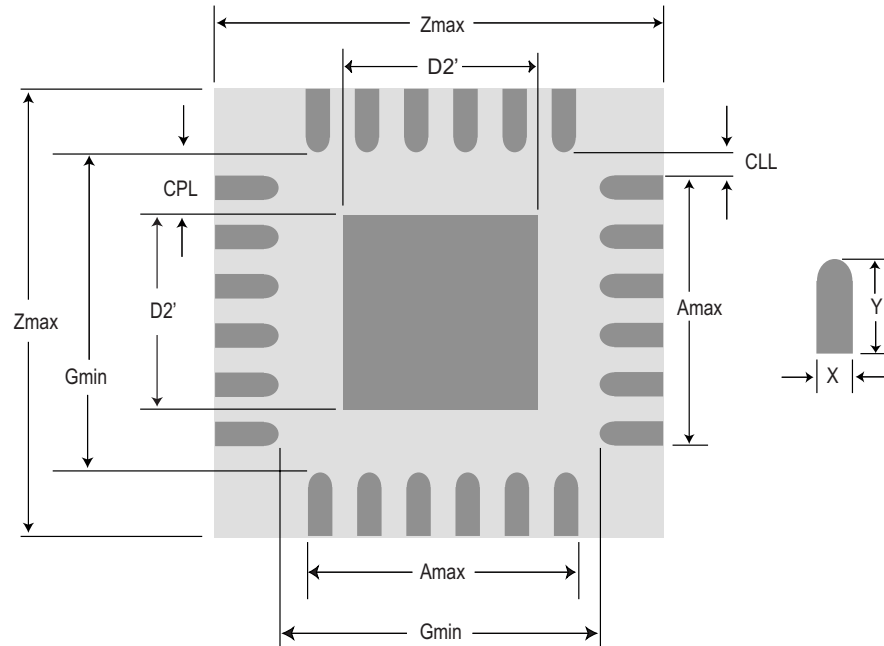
IPC Standard Board Layout of Soldered Pads for QFN Packages
